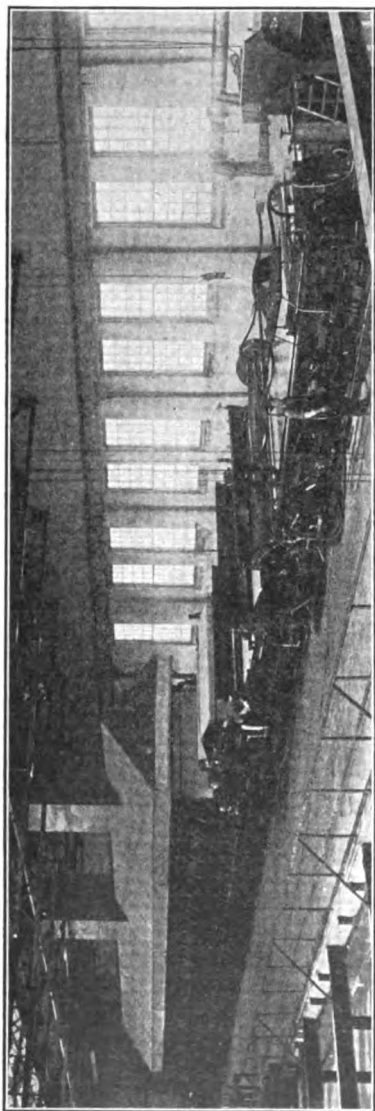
Typical Fourdrinier paper machine from wet end.
